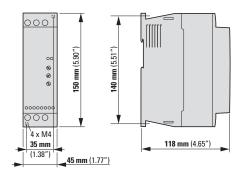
Dimension drawing DS7 without SWD – Size 2 (16 – 32 A)
